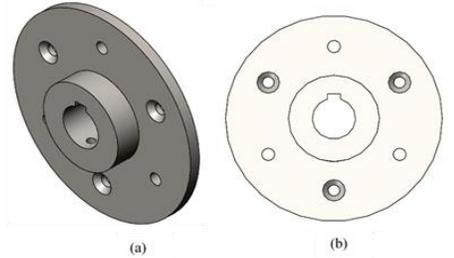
(a) Isometric View of Flange (b) Front View of Flange
